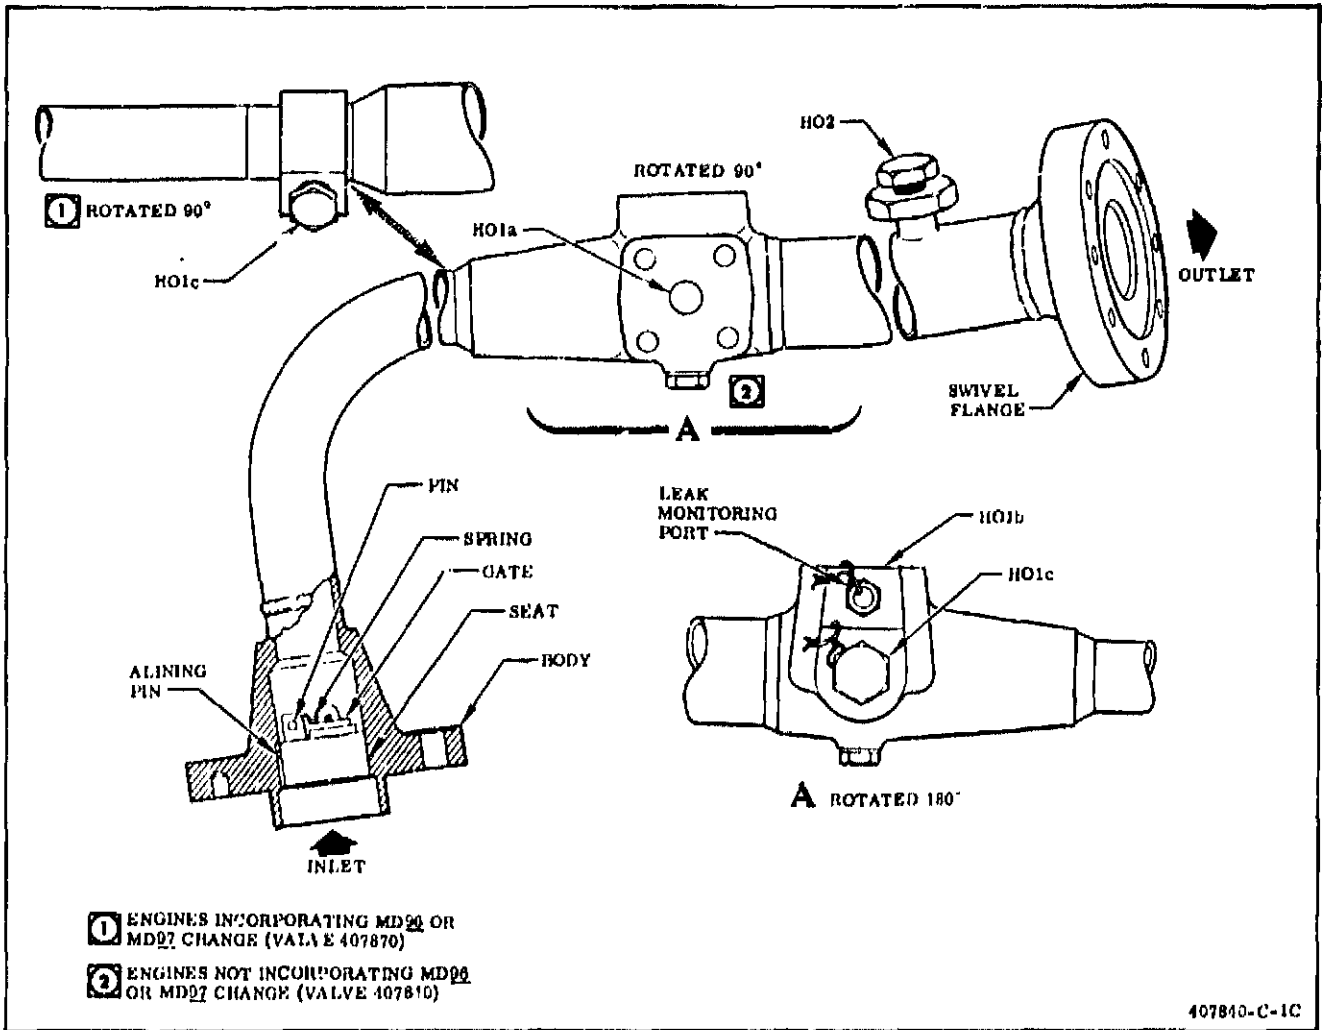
Heat Exchanger Check Valve--Cutaway View
